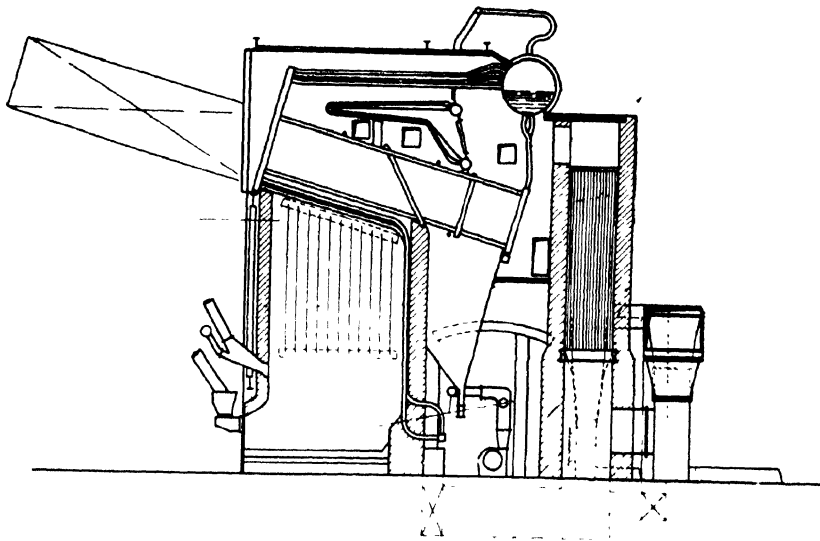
Cross-type header boiler to burn bagasse and coal.
